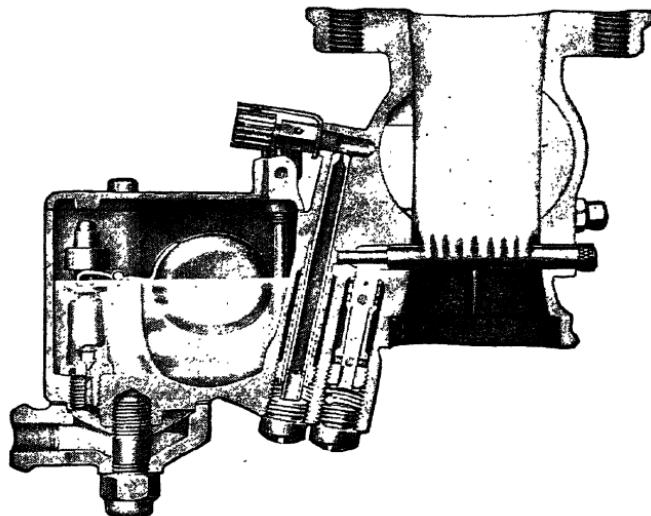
Cross Sectioned View of Winfield Carburetor at Wide-Open Throttle
